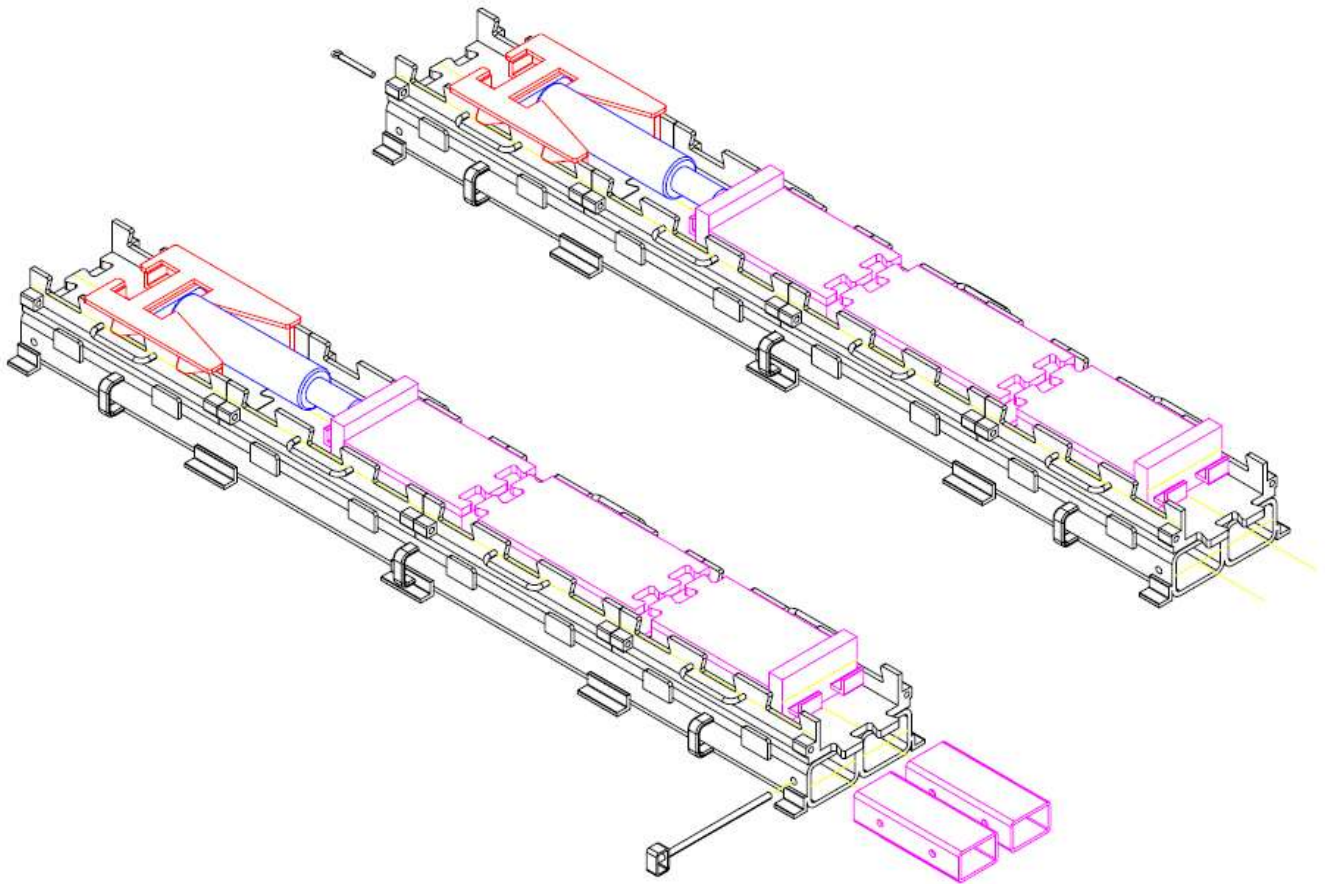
M400 Modular Hydraulic Skidding System (shown with optional support beams & filler shoes)
